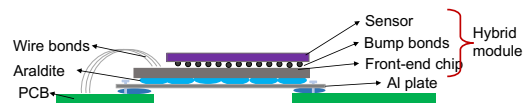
Sketch of a module assembly. A module consist of the hybrid module wire bonded to a PCB.
